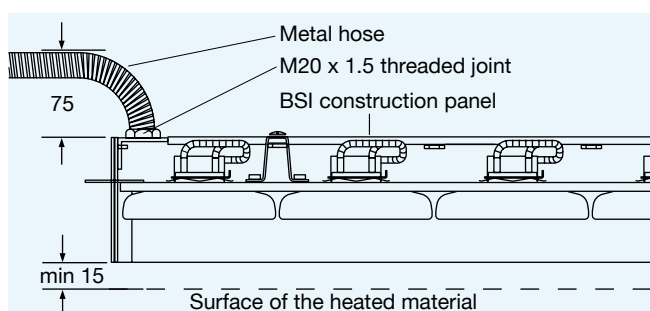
Arrangement of the connection unit for establishing the mains connection. Dimensions in mm
